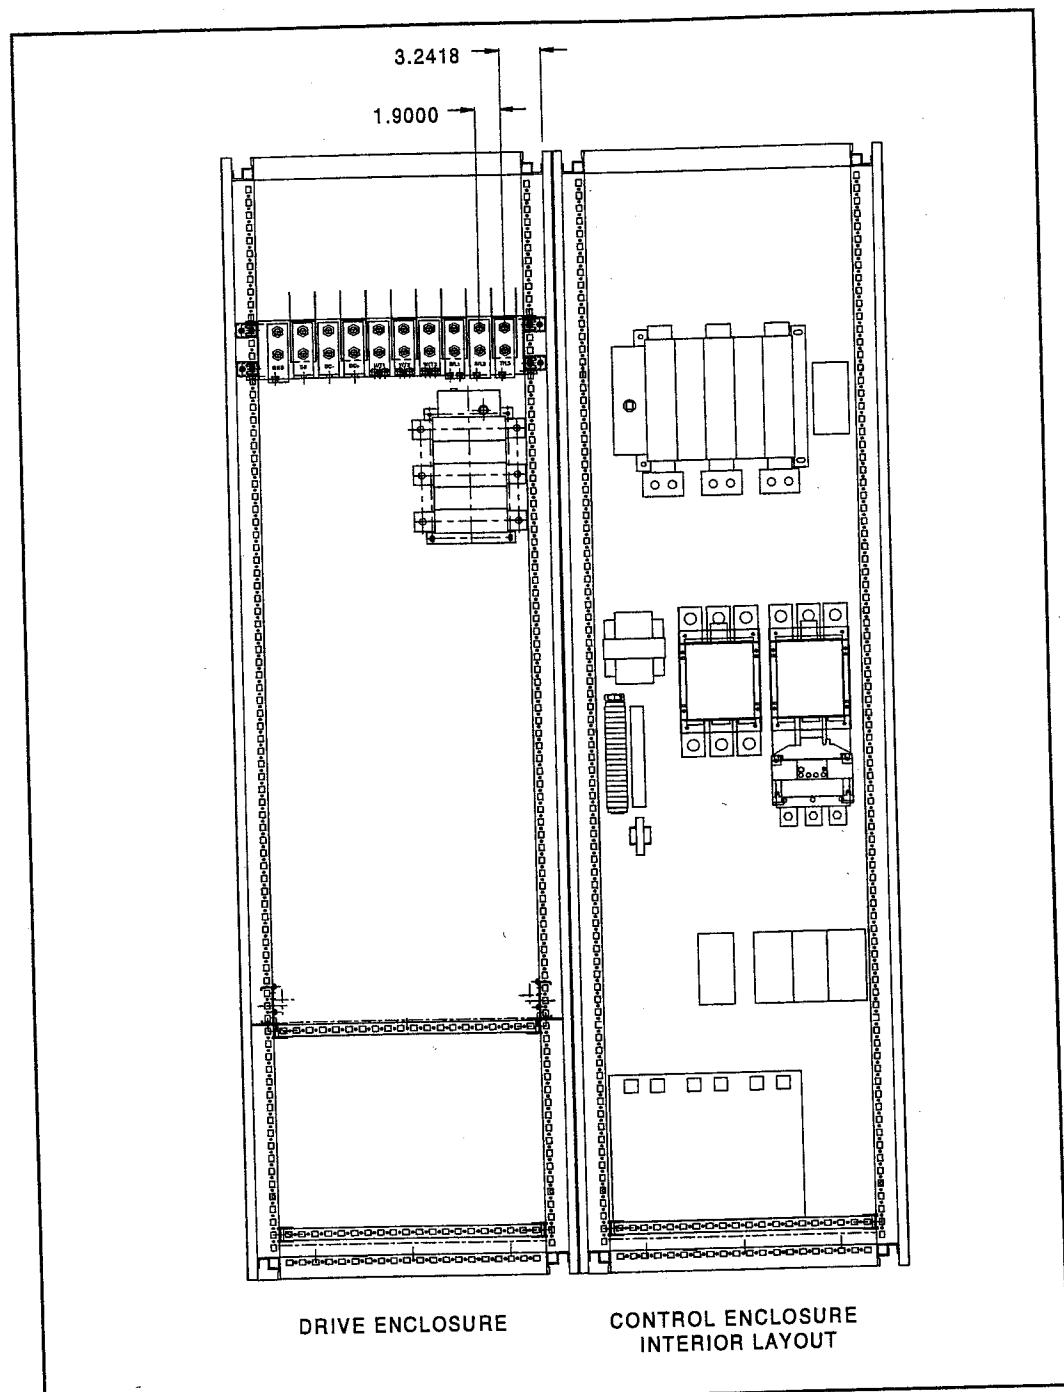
Floor Mount Option Style B+ Drive Panel Layout (200-400HP @ 460V)
